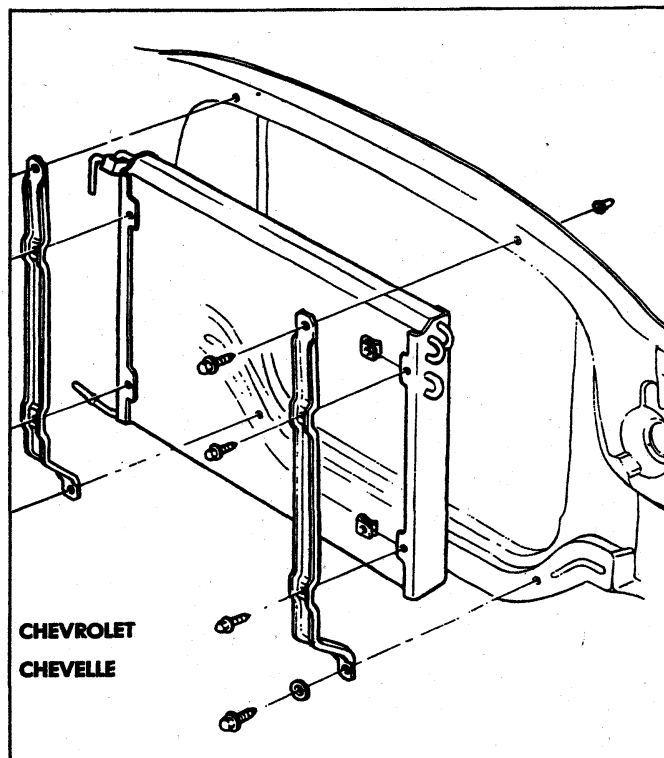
Condenser Mounting (Chevrolet and Chevelle)
